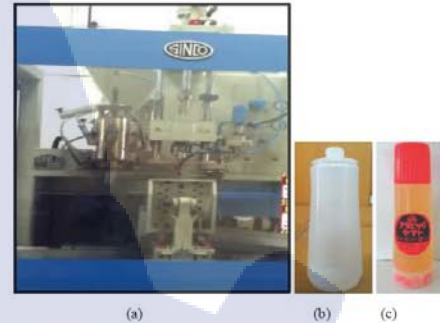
The close up photo of (a) the mold of the blow molding machine as heat source of the cooling tower, (b) plastic bottle, (c) final product.
